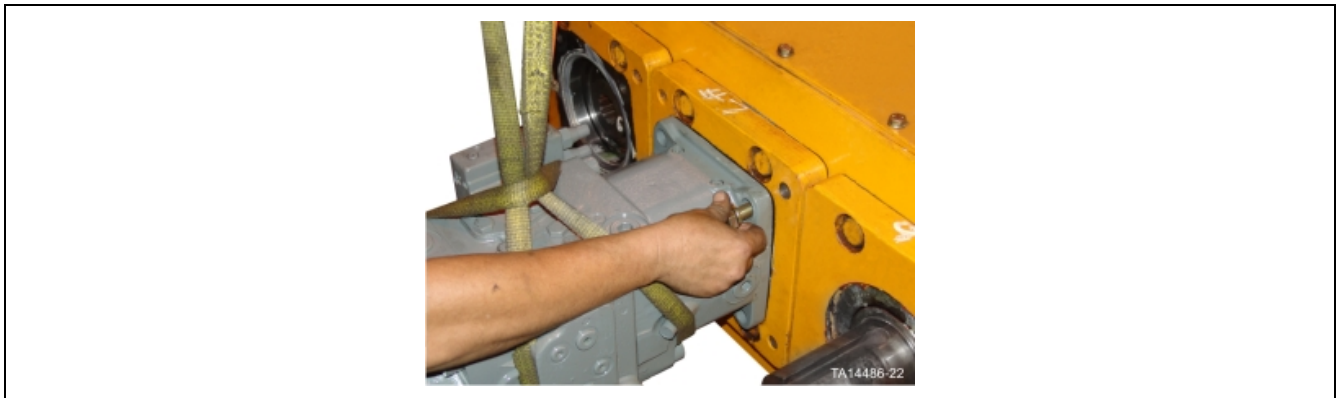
Application of assembly grease to pump O-ring and pump.
